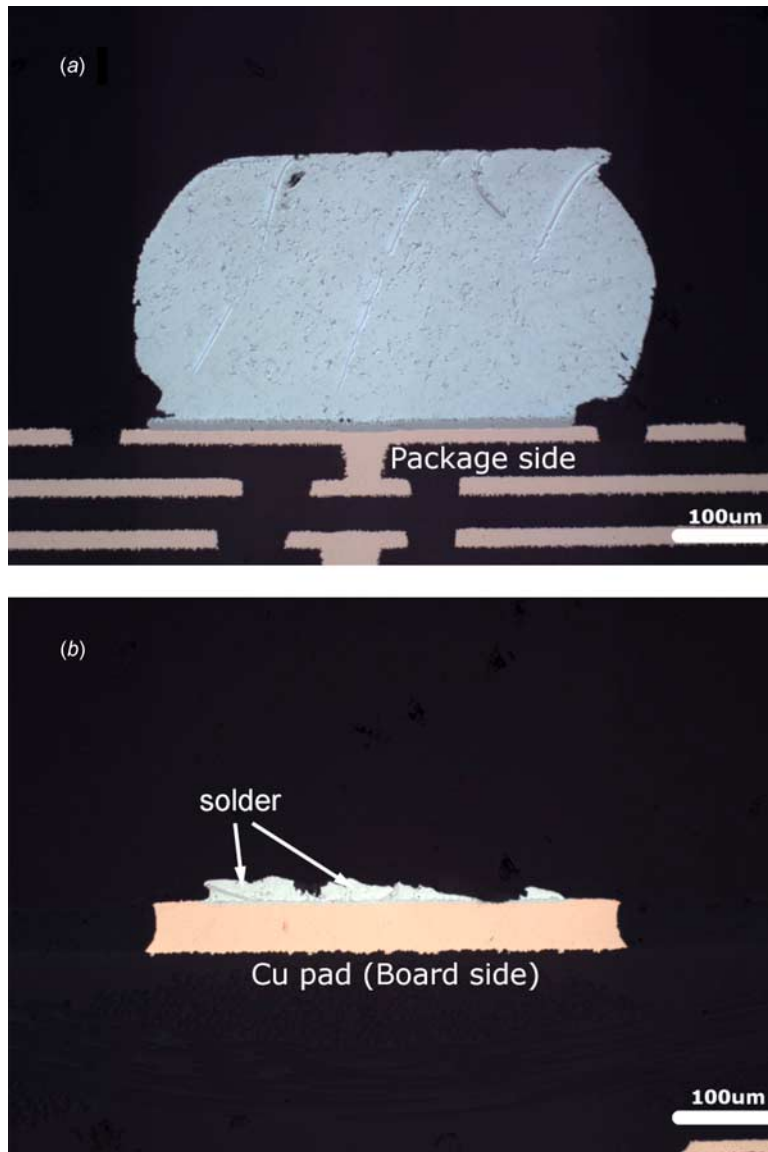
Failure occurs along the path of (solder/IMC + solder matrix) at board side under the loading mixity of 60°: (a) Solder joint at package side; (b) residue Cu pad at board side.
